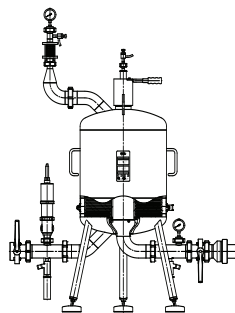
Outline drawing, 1 to 3-high SUPRApak L-SA housing
